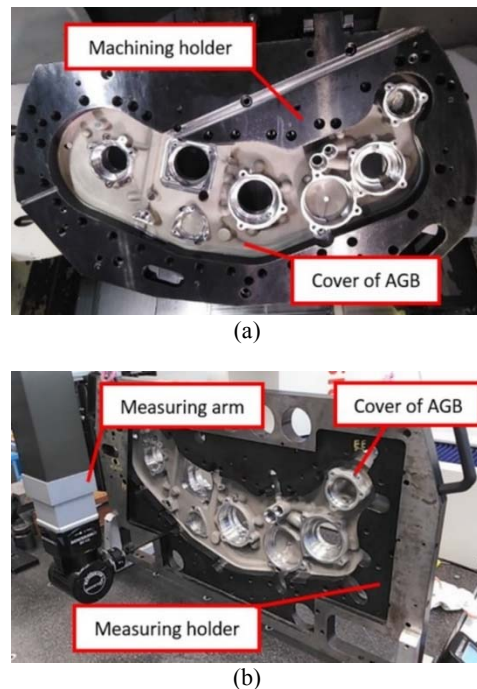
AGB casing cover: a) in a fixture in a CNC machine, b) in a measurement laboratory on a CMM.
